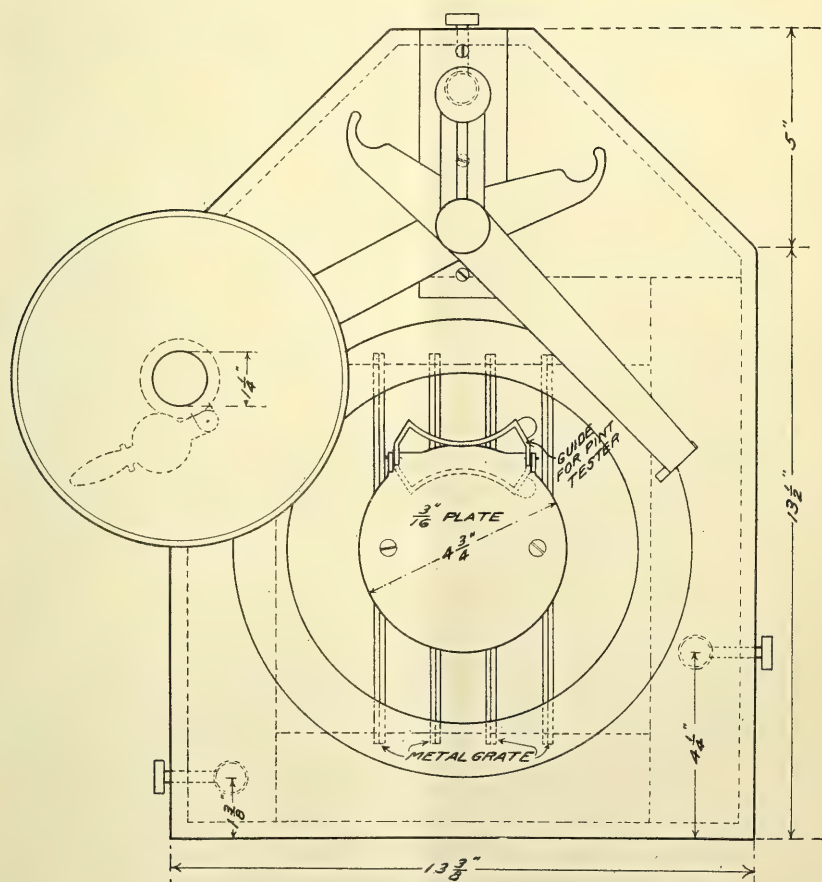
Diagrammatic view of the testing apparatus, illustrating the arrangement of the iron grating, the plate, and the guide.
